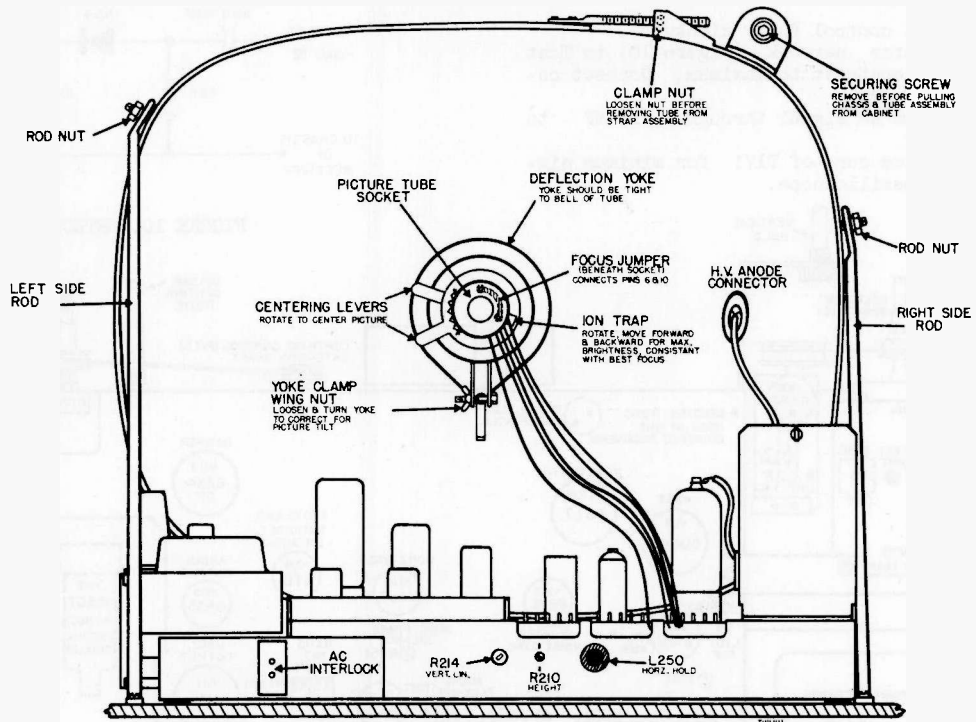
REAR VIEW, PICTURE TUBE AND CHASSIS BOARD ASSEMBLY
